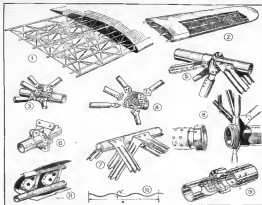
CONSTRUCTIONAL DETAILS OF THE JUNKERS WING: (1) AND (2) GENERAL CONSTRUCTION; (3) TO (7) DETAILS OF WING BRACING; (8) AND (9) DETAILS OF WING ATTACHMENTS; (10) CONNECTION BETWEEN COLLARS, (11) LEADING EDGE.
